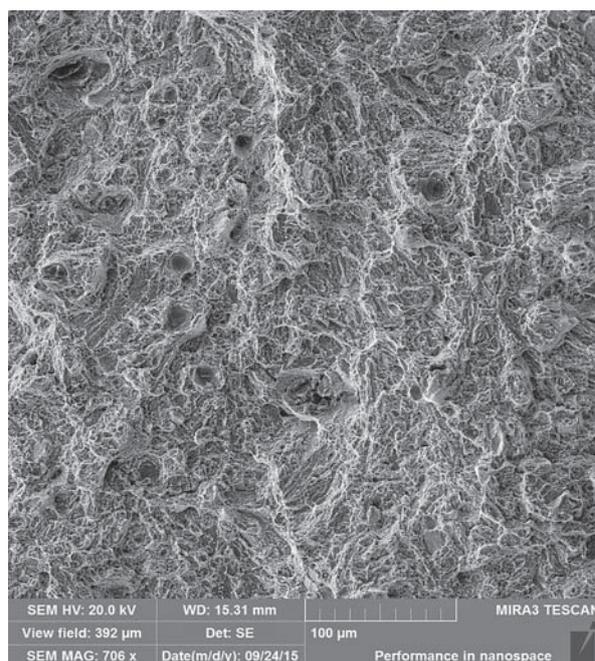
Fracture surface of specimen SPH with V - notch
